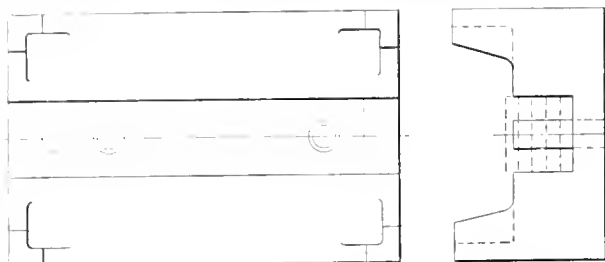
Form of Jig which may be used for drilling a Number of Pieces Simultaneously.
